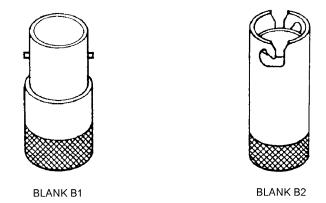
Respirator Assembly Test Set Components - A/E47T-28 (Sheet 1 of 3)
